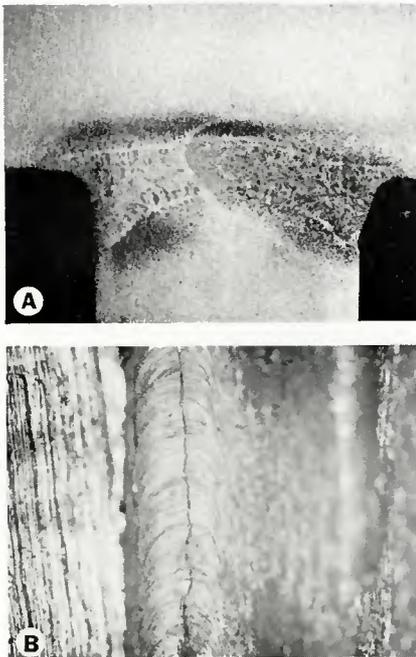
(a) A cross section showing crack free cruciform welds in an SAE 1020 steel; (b) Cruciform welds in SAE 1045 material showing a large centerline crack clearly visible from the top of the weld
